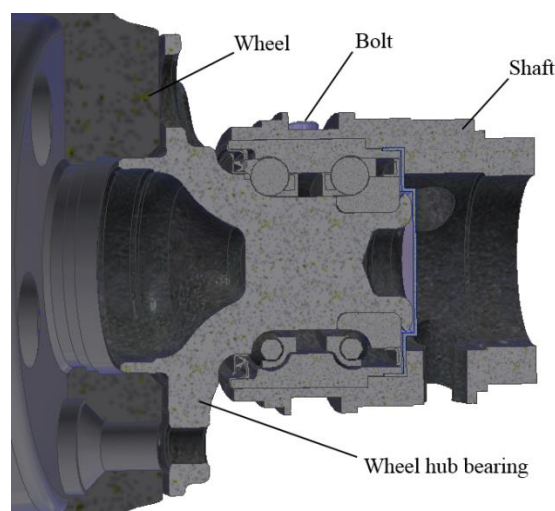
Integration of Bearing Unit BAR-0230 in LeiRaMo-motor
